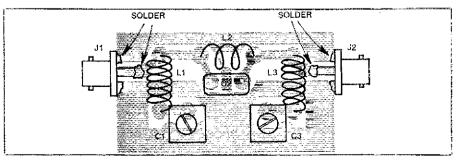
Parts-placement guide for the filter. The shaded area represents an X-ray view of the copper pattern. The two BNC connectors are each soldered to the board in three places as shown.
